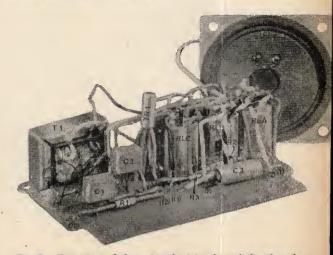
Top view of the printed wiring board showing the component layout and connections. The transformer can be mounted on the board or in the plastic box
